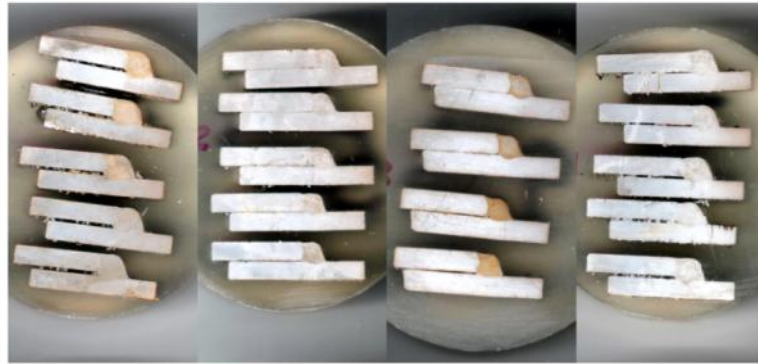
cutcheck cross sections of lap welds
